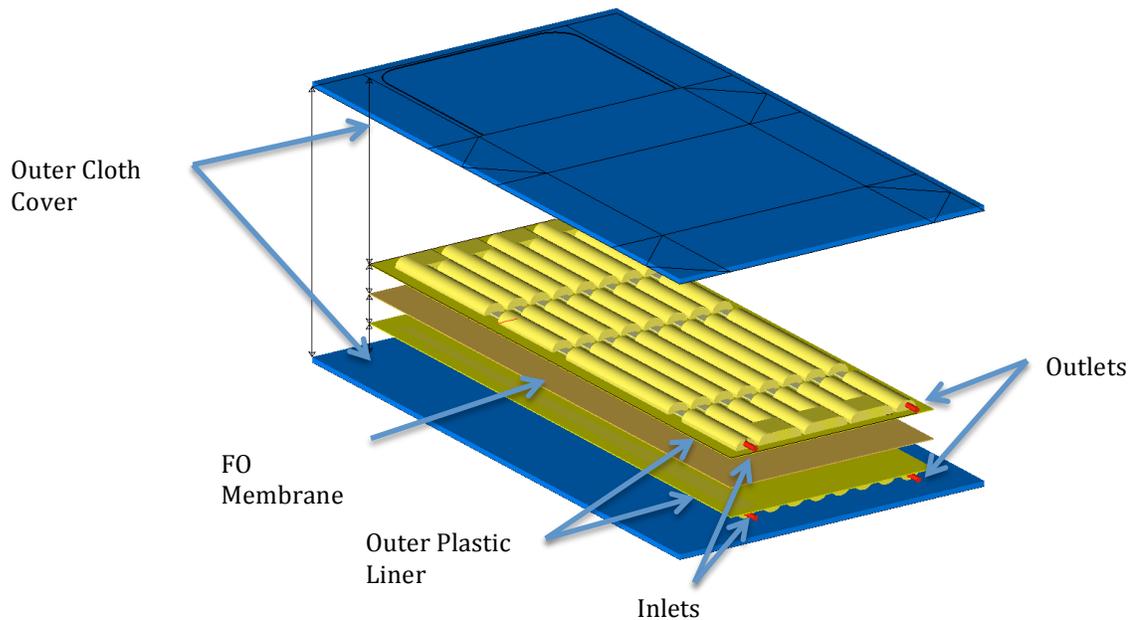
Exploded view of proposed new FO-CTB design with internal water bladders filled. Bladders lay flat in unfilled bags.
